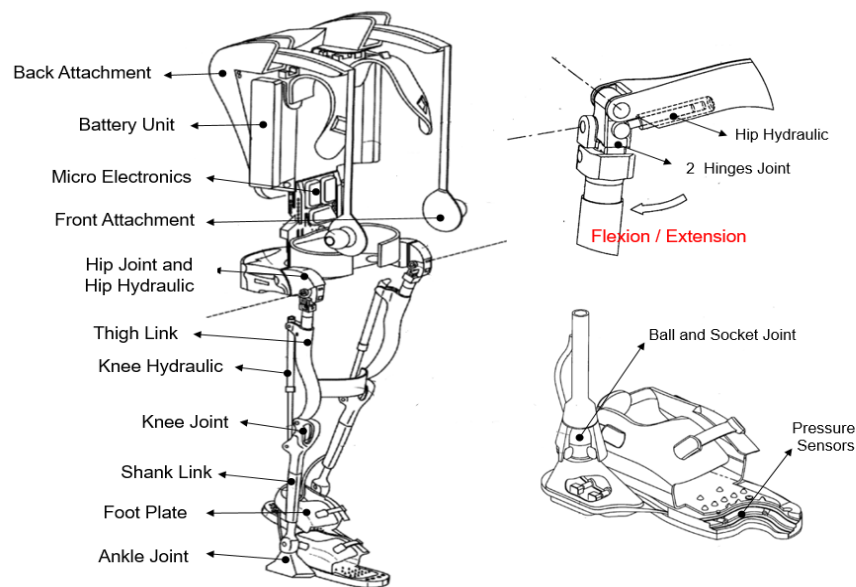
Drawing of current generation of HULC (left), of HULC hip joint assembly (top right) and HULC foot assembly [48].
